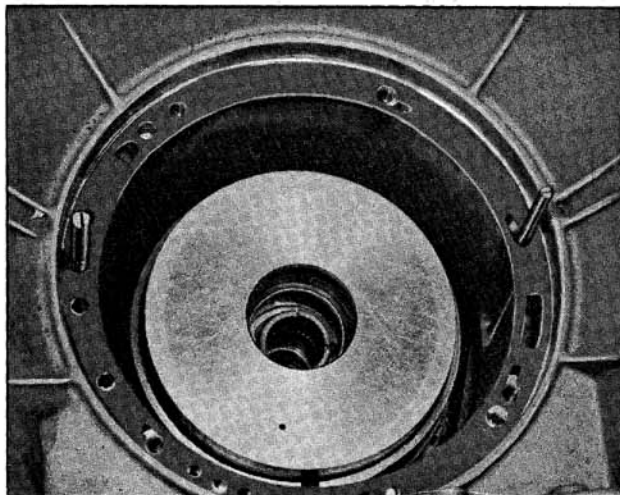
Installing Oil Pump Gasket and Guide Pins
